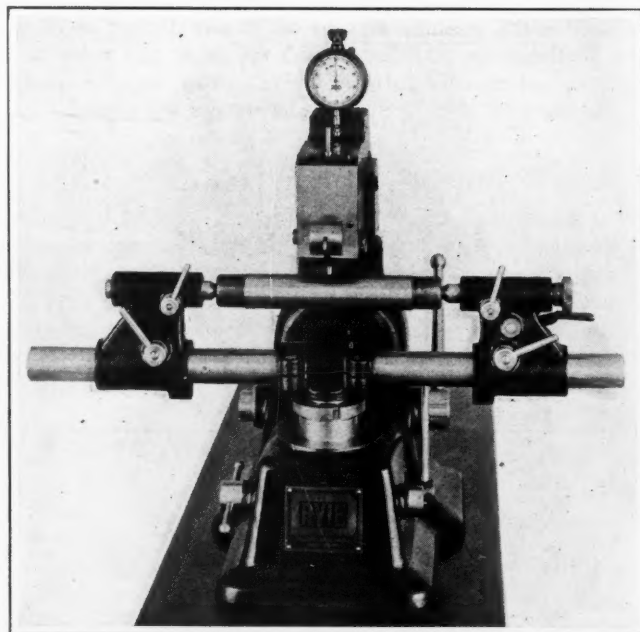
Davie Gaging Machine with Attachment for testing Concentricity of Cylindrical Work, shown in Operation
